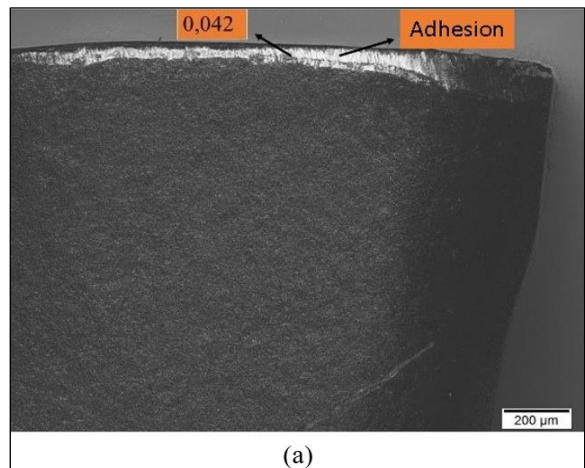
Wear on the secondary flank with insert 0,4 mm: (a) Without sealant.
